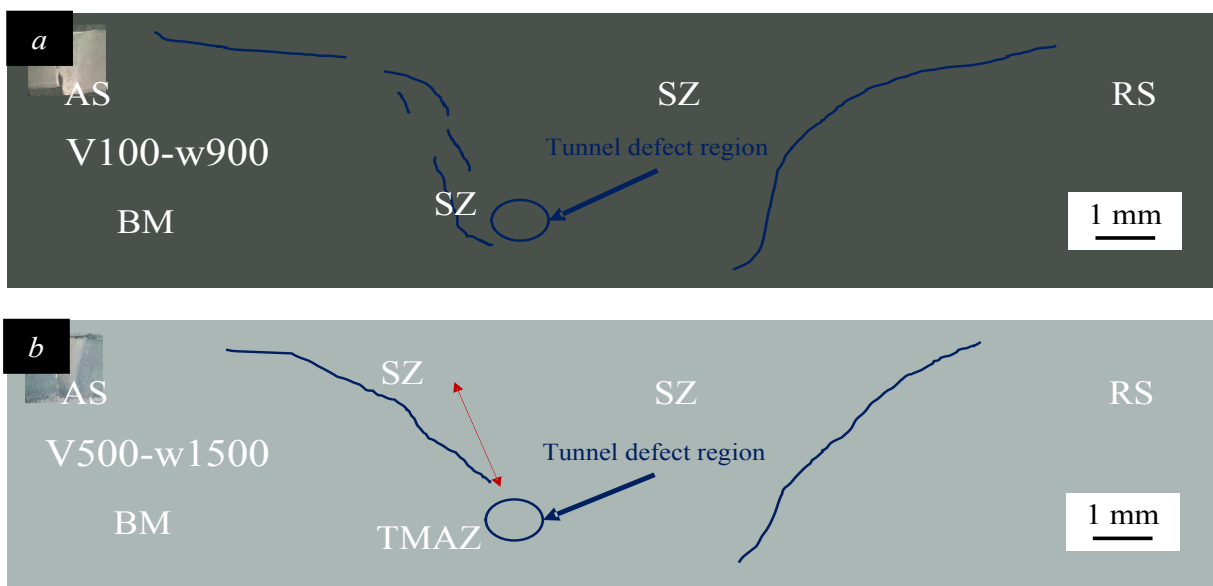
Cross-sections of the failed a) V100-w900 and b) V500-w1500 joints.
